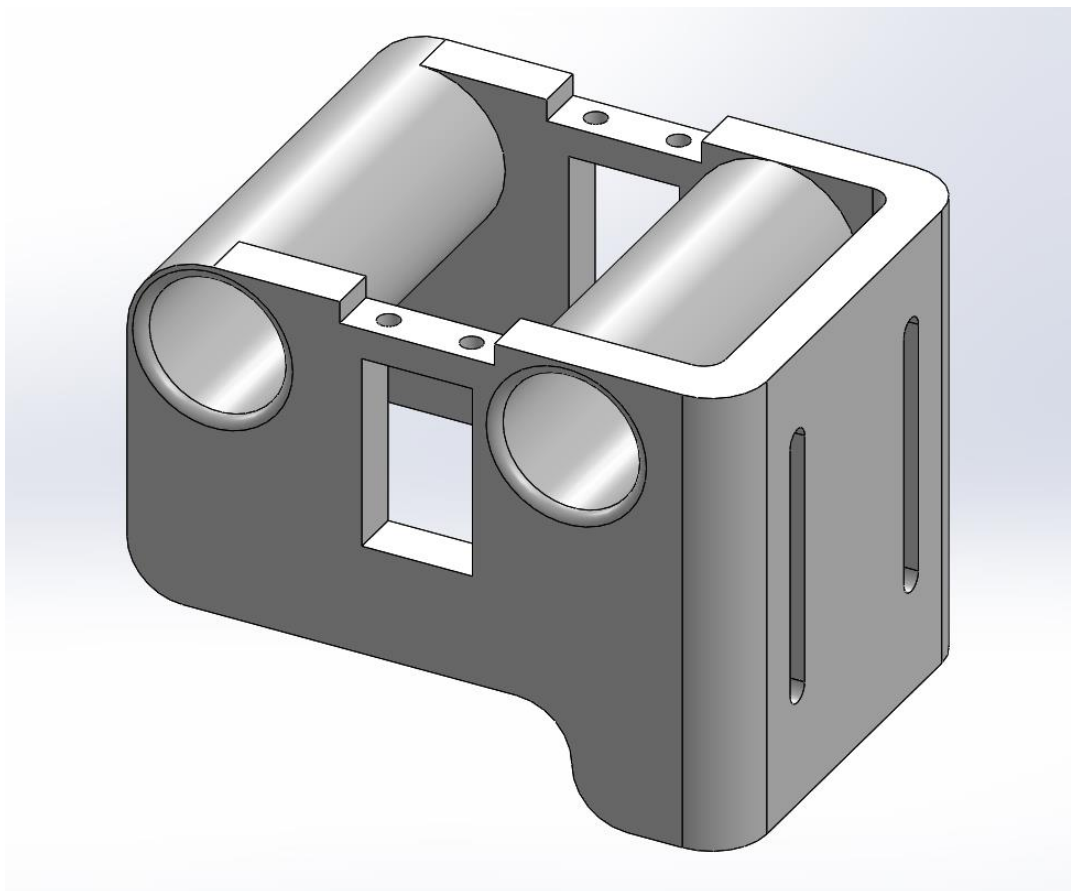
Updated X axis housing to accommodate linear bearings and improved print head adjustment
